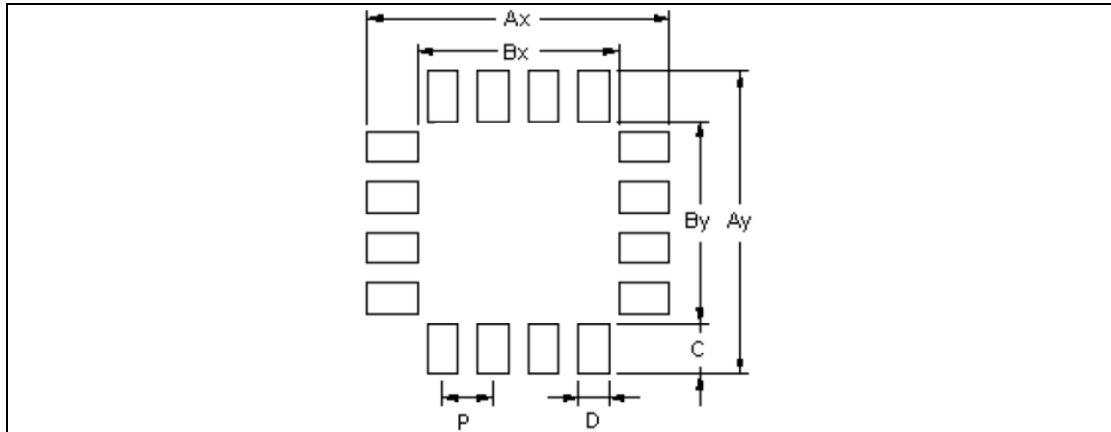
QFN16 footprint: Please refer to the Table 12 for the dimensions. For best temperature accuracy it is not recommended to solder the thermal pad of the QFN package to the printed circuit board
